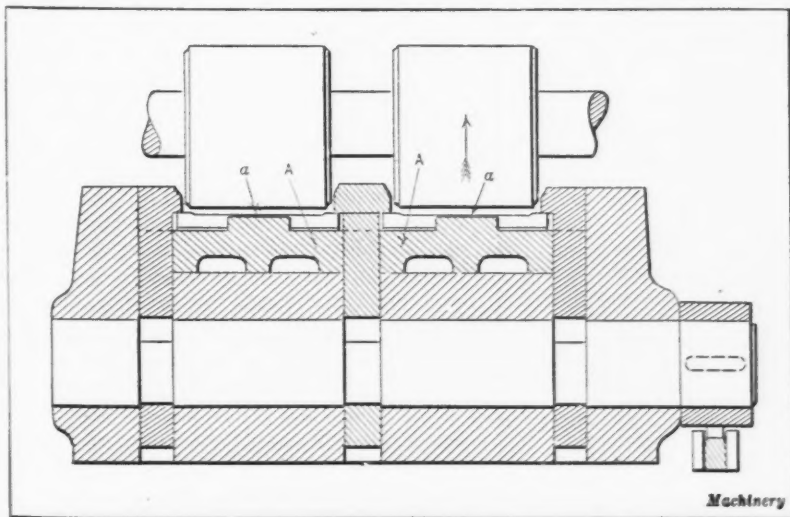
Cross-sectional View of Fixture shown in Fig. 8
